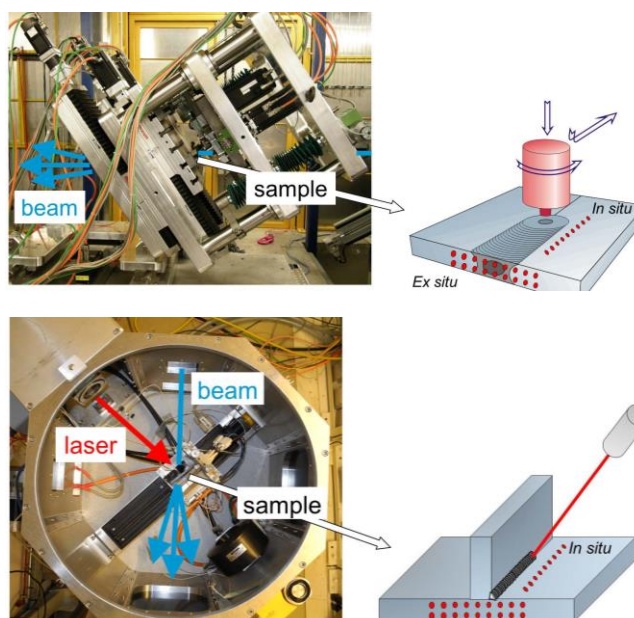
Small scale Friction Stir Welding (top) and Laser Welding (bottom) machines operated by HZG on high-energy synchrotron X-ray beamline HARWI II at synchrotron DESY in Hamburg, Germany.
